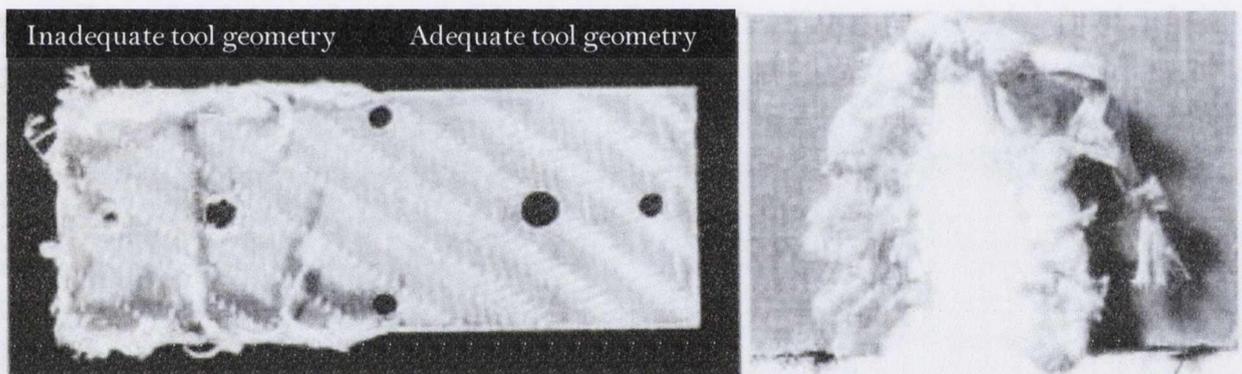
Examples of fibre linting of aramid fibres due to inadequate tool geometry. (Adapted from [37])
